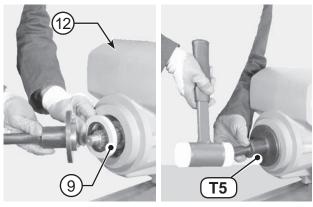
Apply Arexons rubber cement to the outer surface of the new seal ring (9) and fit ring in the main body (12) using driver T5 (See drawing T5 p. 93).
